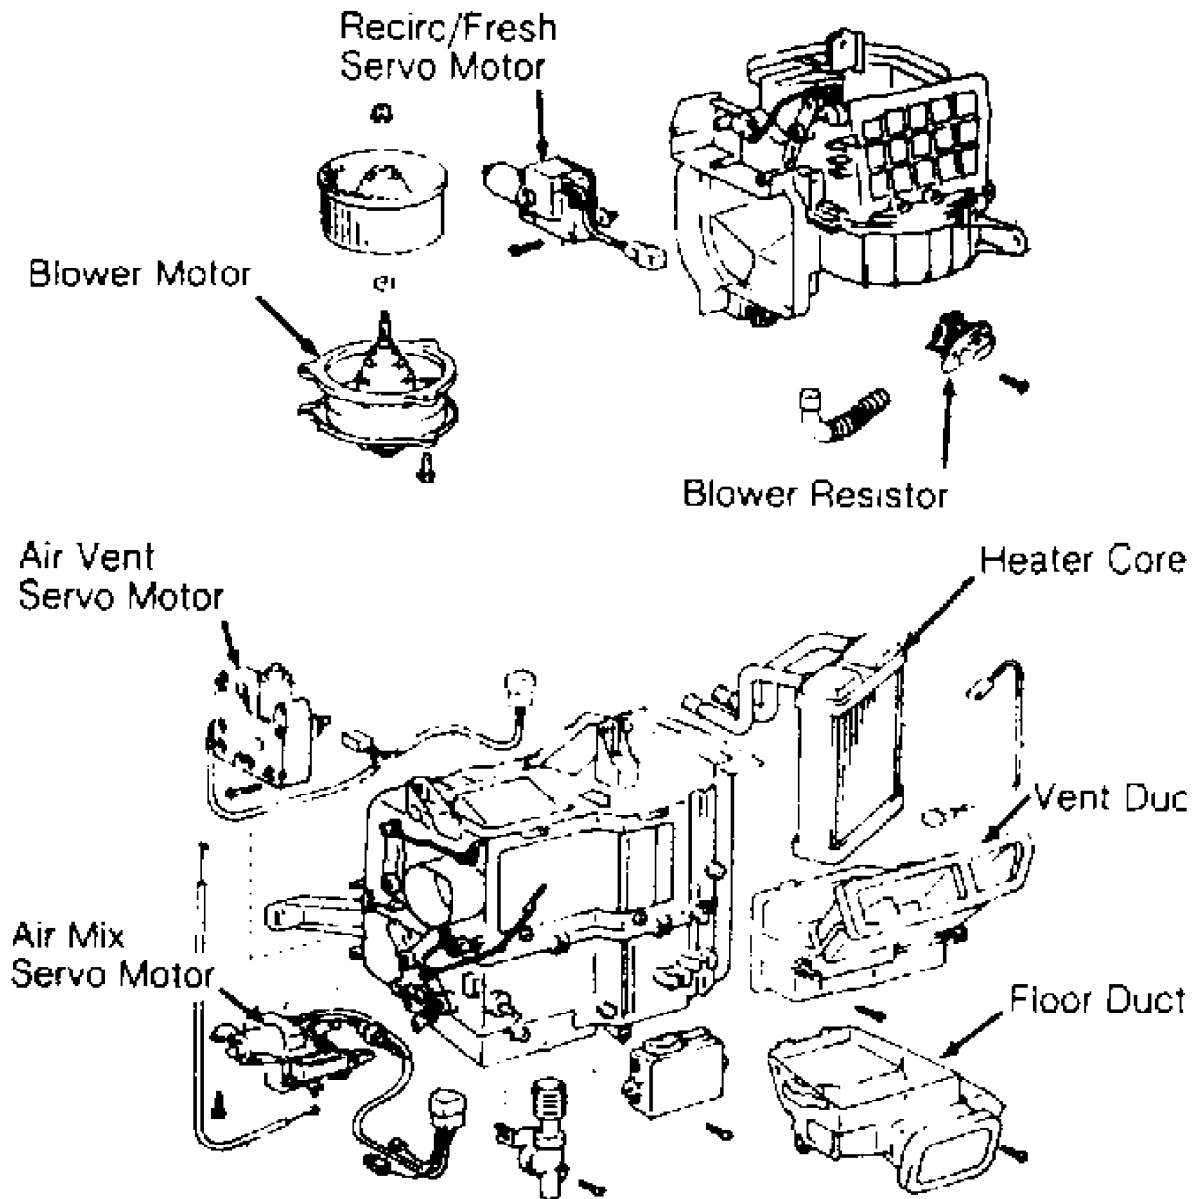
Exploded View of Celica Button Type Heater Assembly
